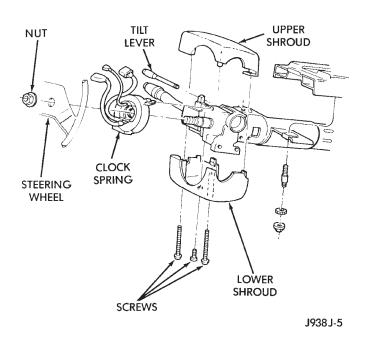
Steering Column Shrouds Remove/Install - Typical
